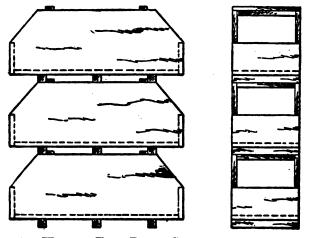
WOODEN TOTE BOXES STACKED INTO RACKS ON THE SECTIONAL-BOOKCASE PLAN
